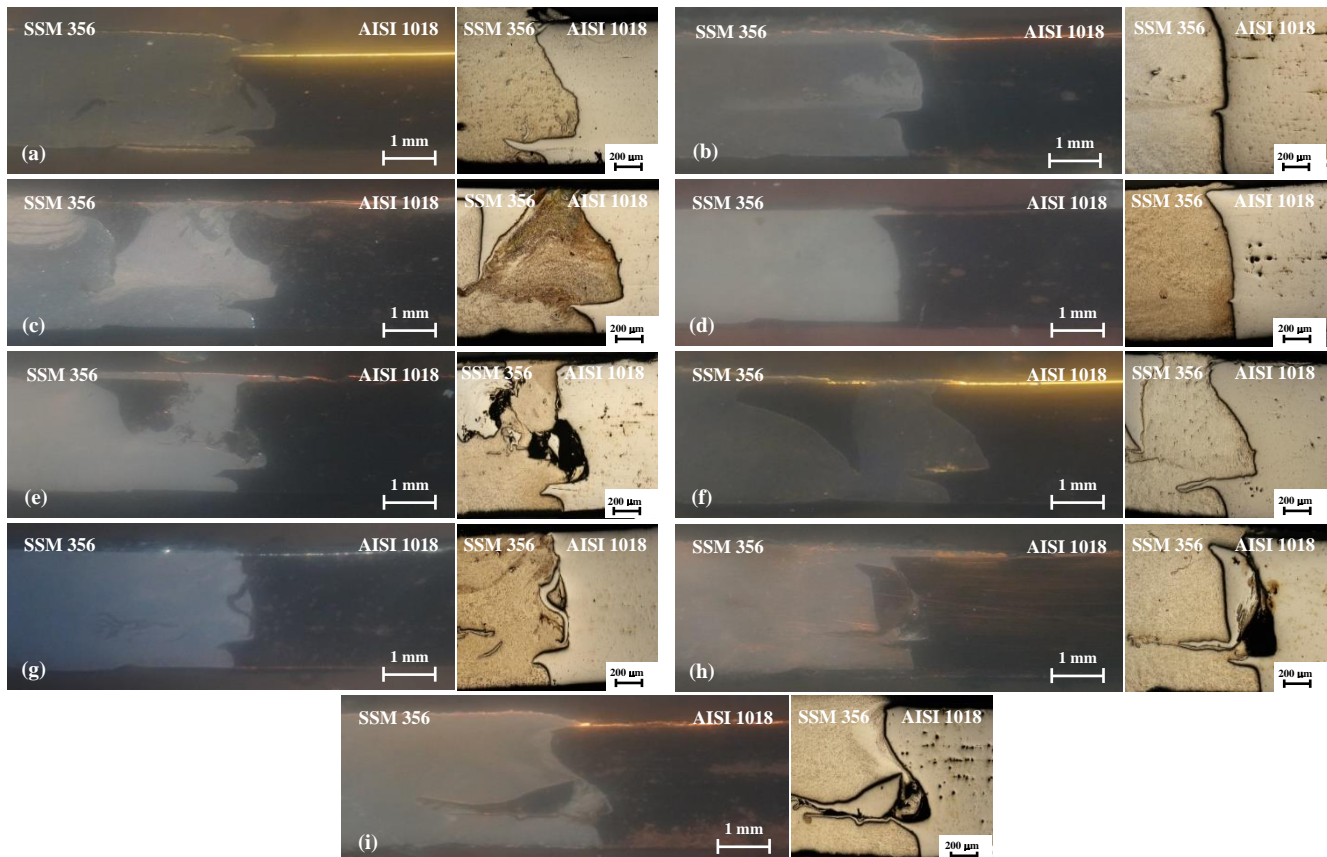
Macro and micro structures of the weld for (a) FSW1, (b) FSW4, (c) FSW7, (d) FSW2, (e) FSW5, (f) FSW8, (g) FSW3, (h) FSW6, and (i) FSW9.
